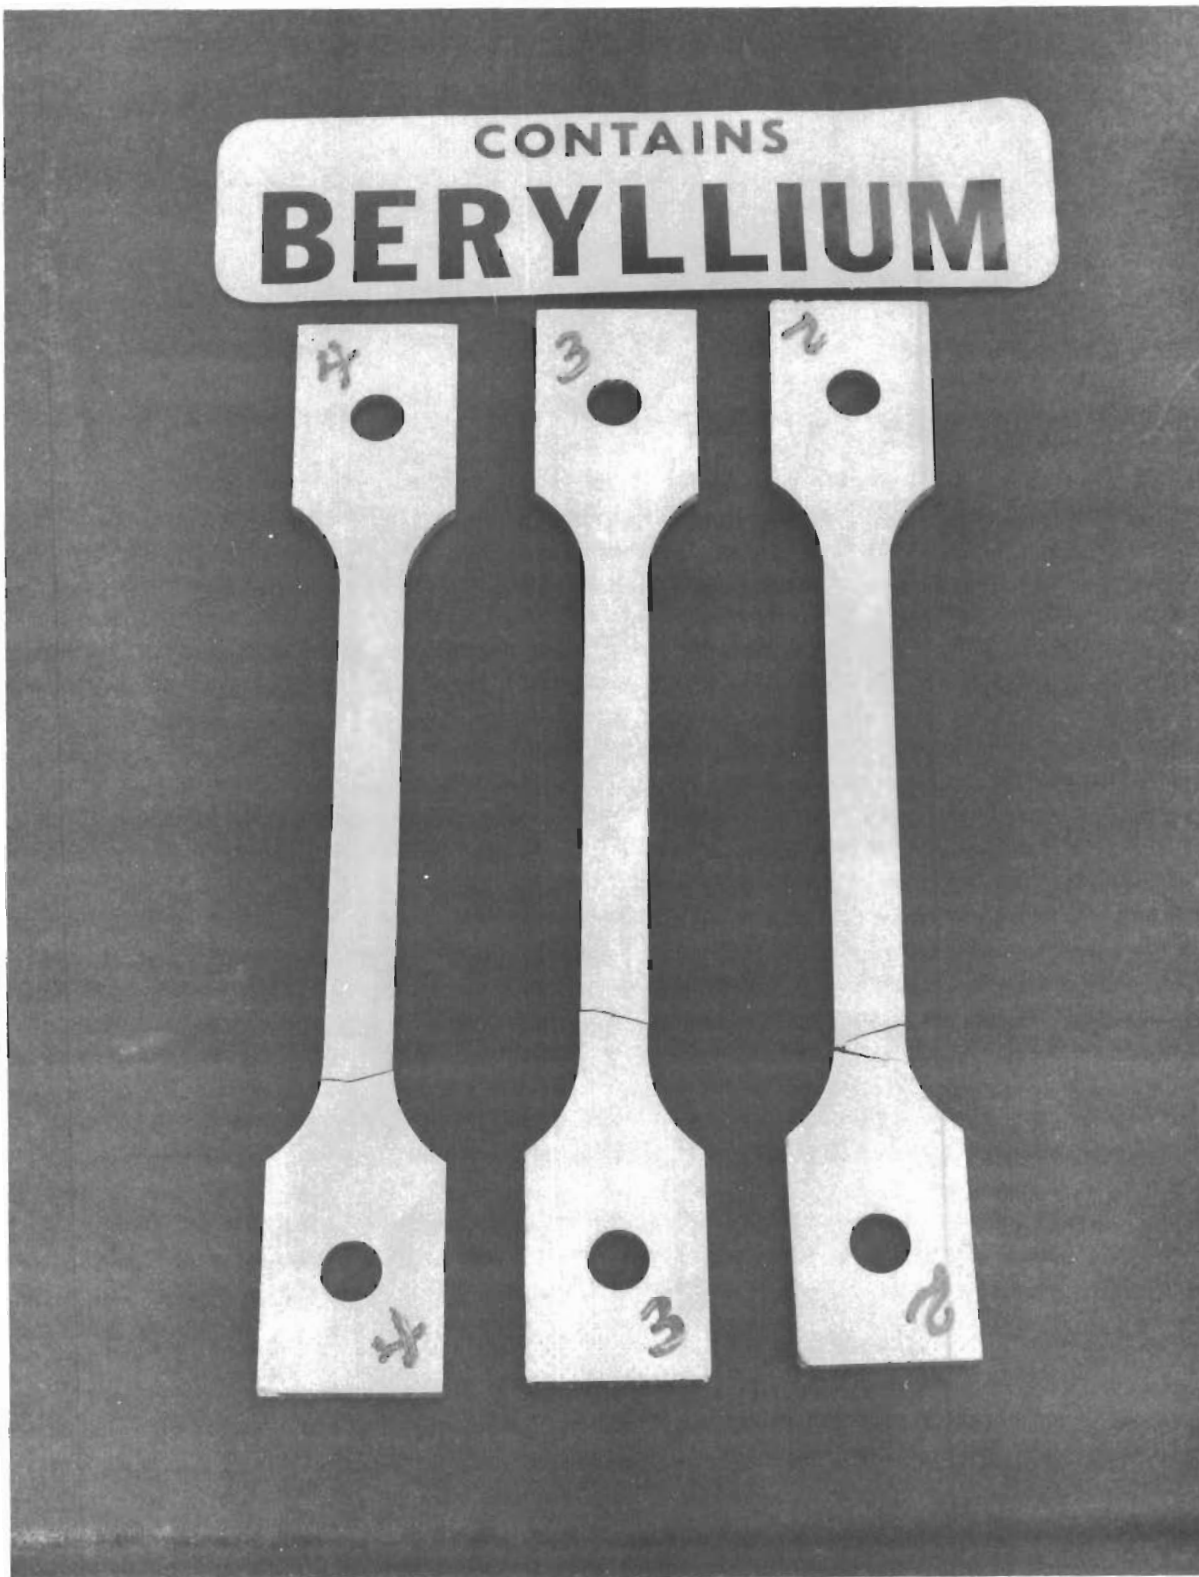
FRACTURED LONGITUDINAL TENSILE TEST COUPONS
